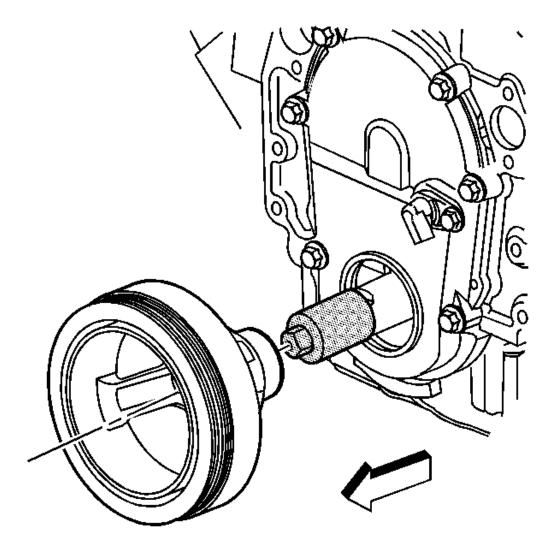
Removing Crankshaft Balancer & J 42846 Courtesy of GENERAL MOTORS CORP.
